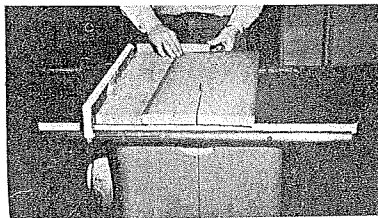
Using the jig to saw the plank for the bottom of the trough.
